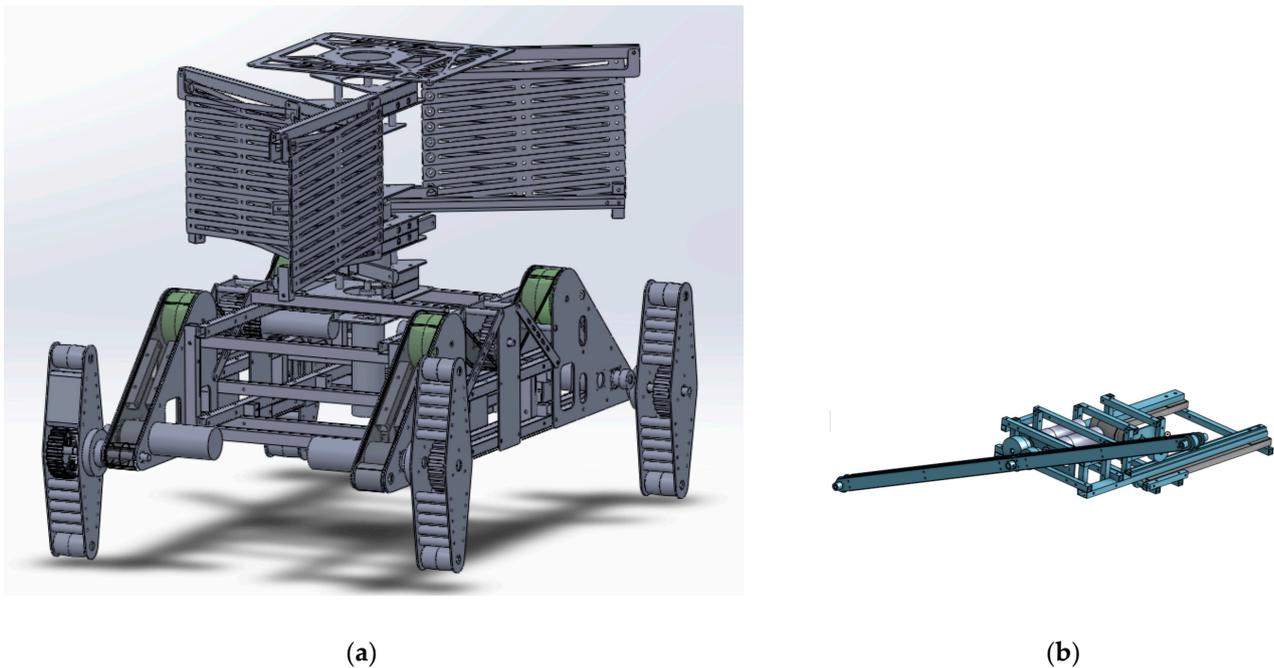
Overall view of the created robot: (a) CAD design of robots; (b) Robot created based on CAD design.
